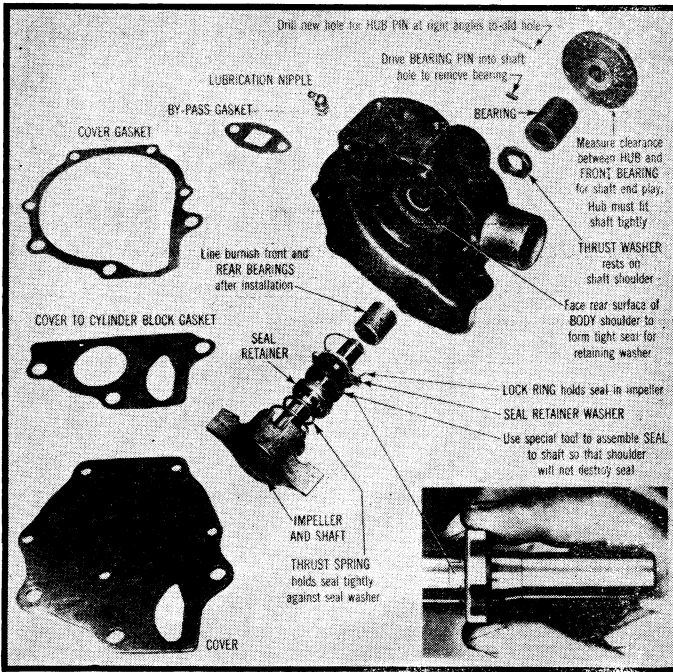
Bushing type water pump. Light-duty six-cylinder engines
